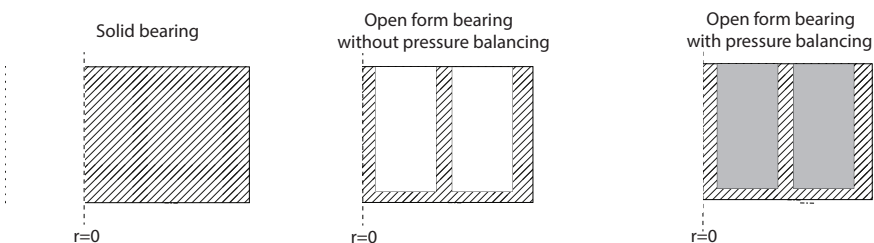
Cross section of a parallel thrust bearing with pressure balancing chambers. The chambers are connected to the pressure film, having equal pressure to the pressure at that location of the profile.
